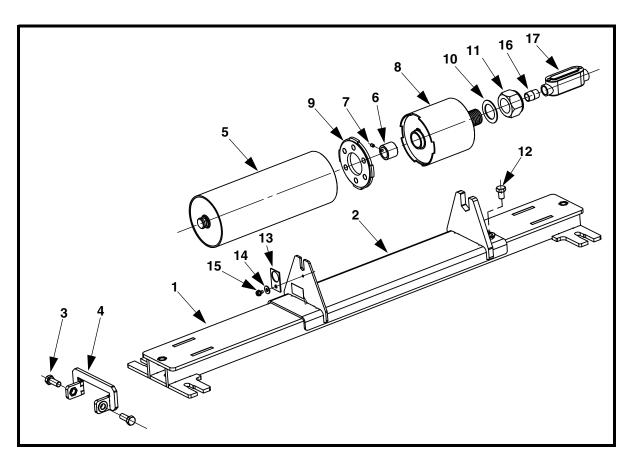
Martin® Roll Generator Assembly, P/N RGTMIXXP-XXCRXX
